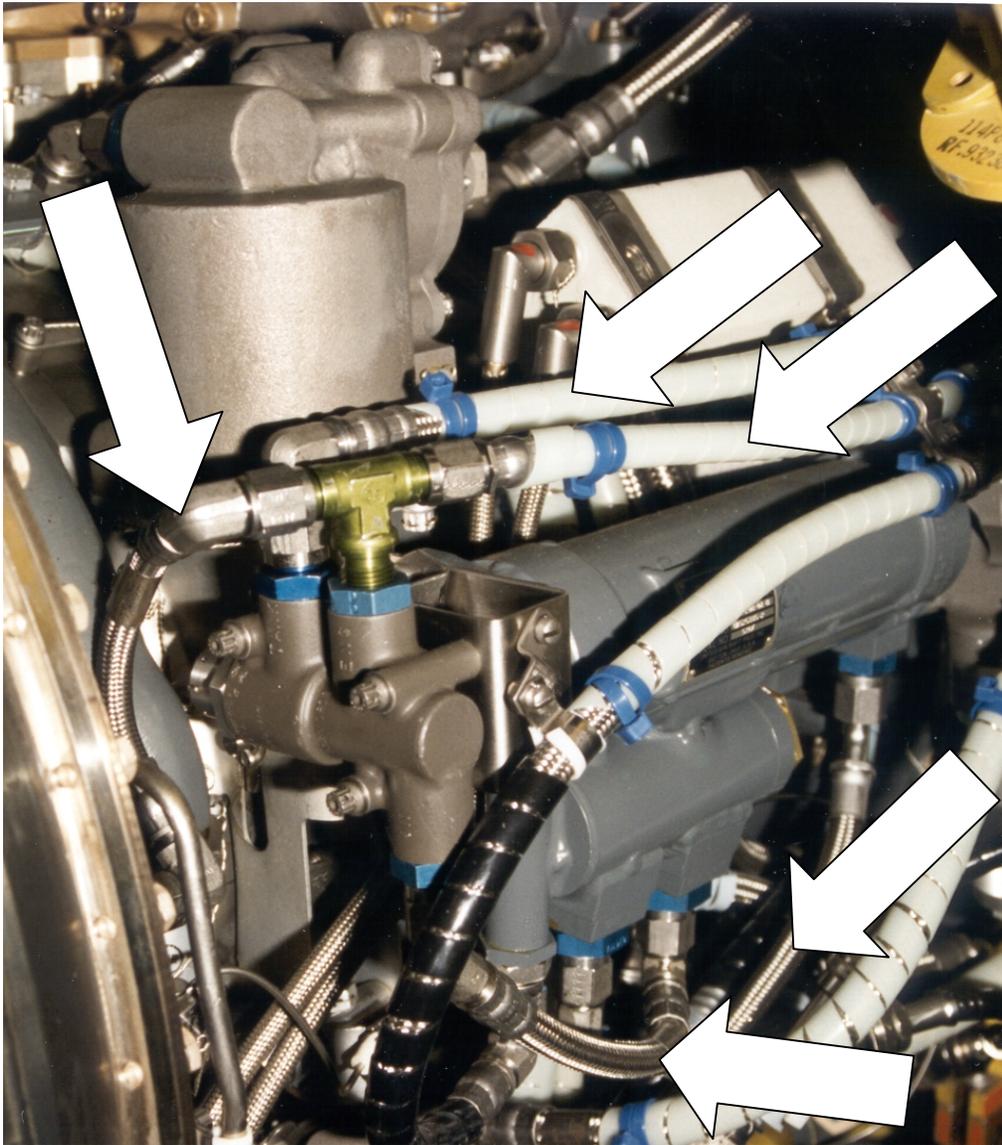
714A Engine RH Side Oil Cooler Area (72-A0)
